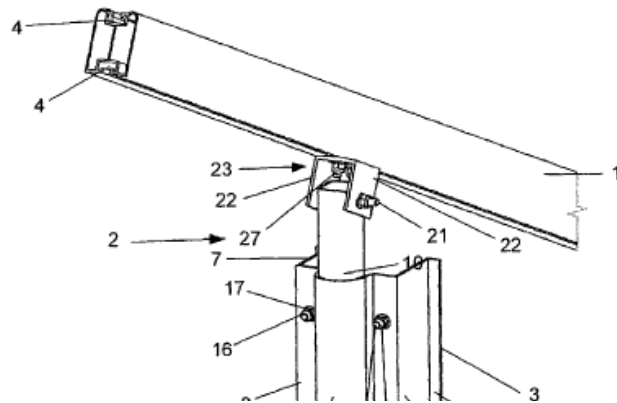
Elevated PV Racking Solution. Patented elevated photovoltaic racking structure with U-bracket connection (System for Mounting an Elevated Solar Installation, from (Nitzko, 2011))
